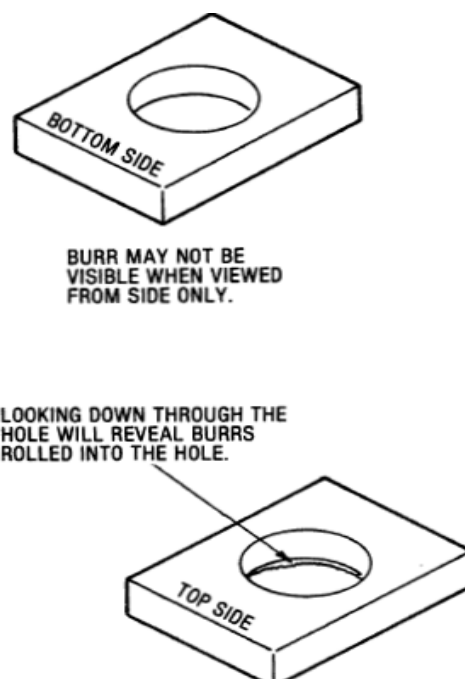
Best Direction for Viewing Rolled-Over-Edge Burr
